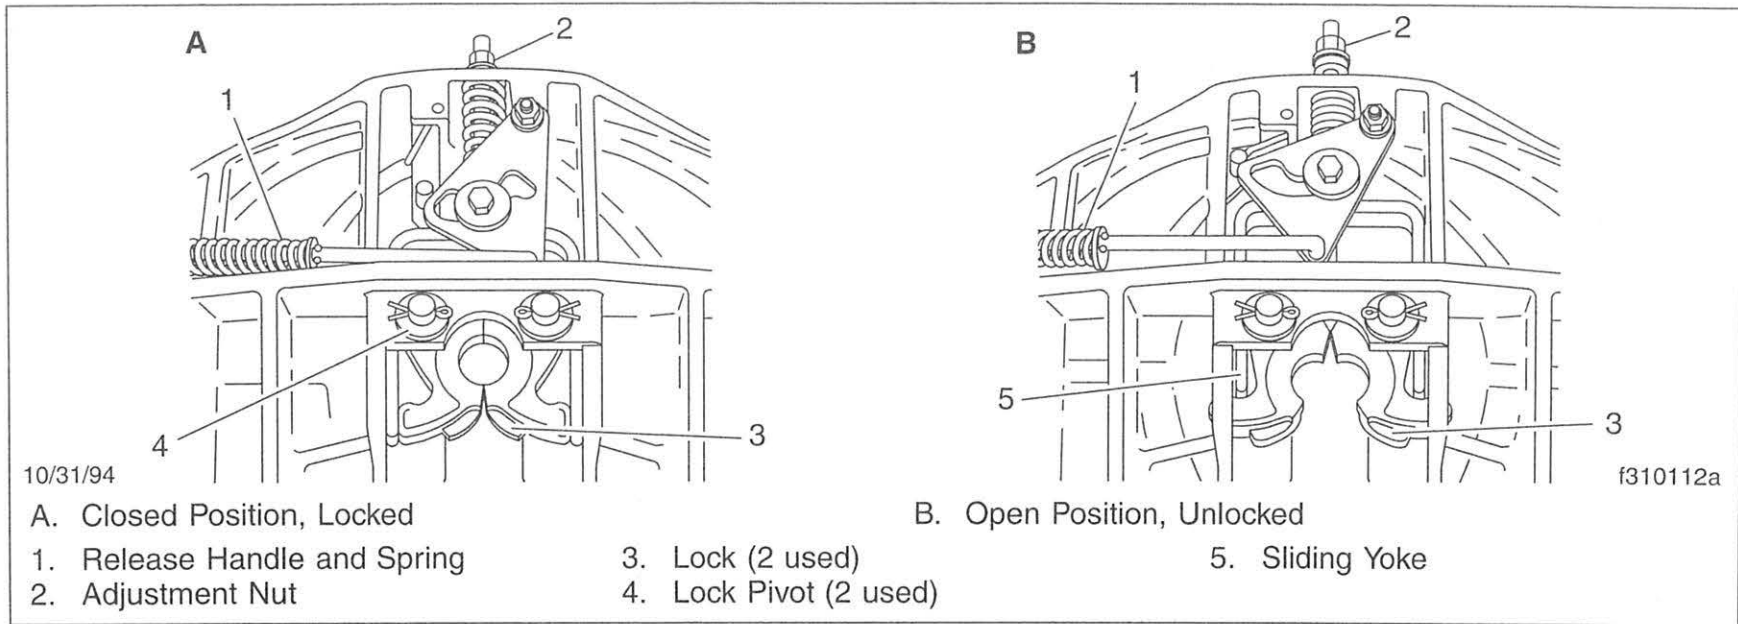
, Type "B" Kingpin Lock Mechanism (bottom view)
